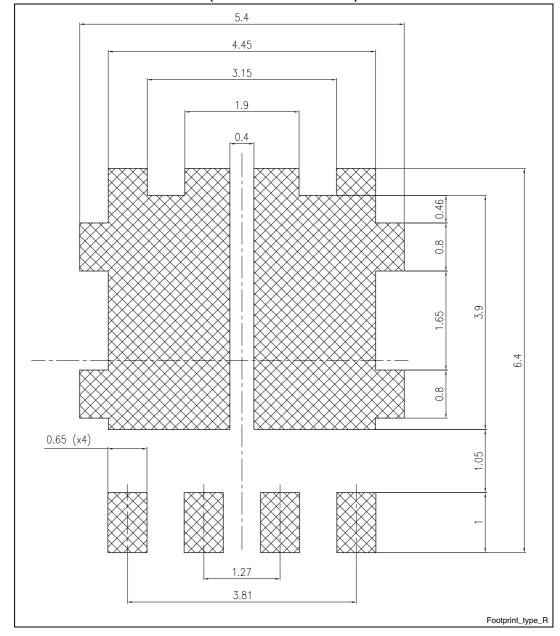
PowerFLAT™ 5x6 double island type R drawing recommended footprint (dimensions are in mm)
